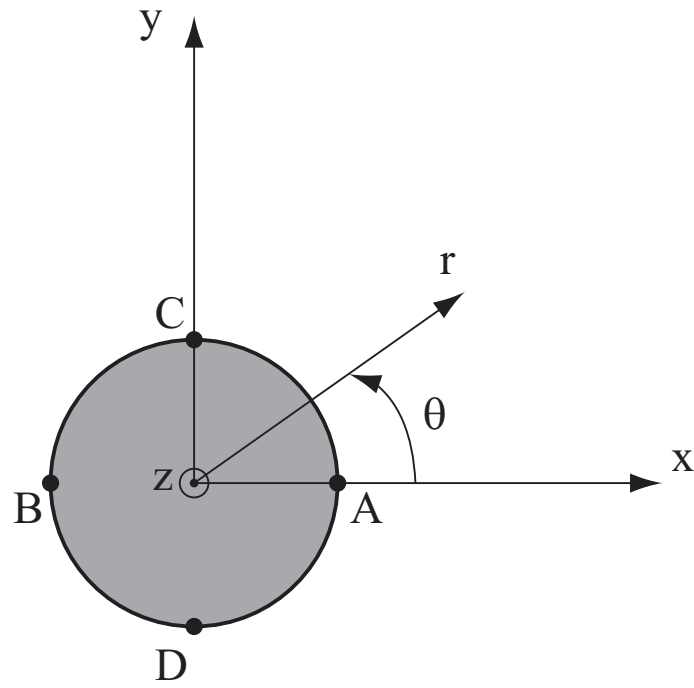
A schematic of a top view of the connection or spot weld (idealized as a rigid inclusion) in the upper plate of the specimen.
